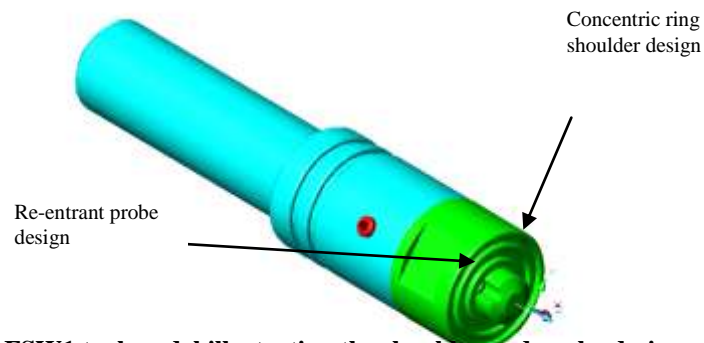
FSW1 tool model illustrating the shoulder and probe designs
